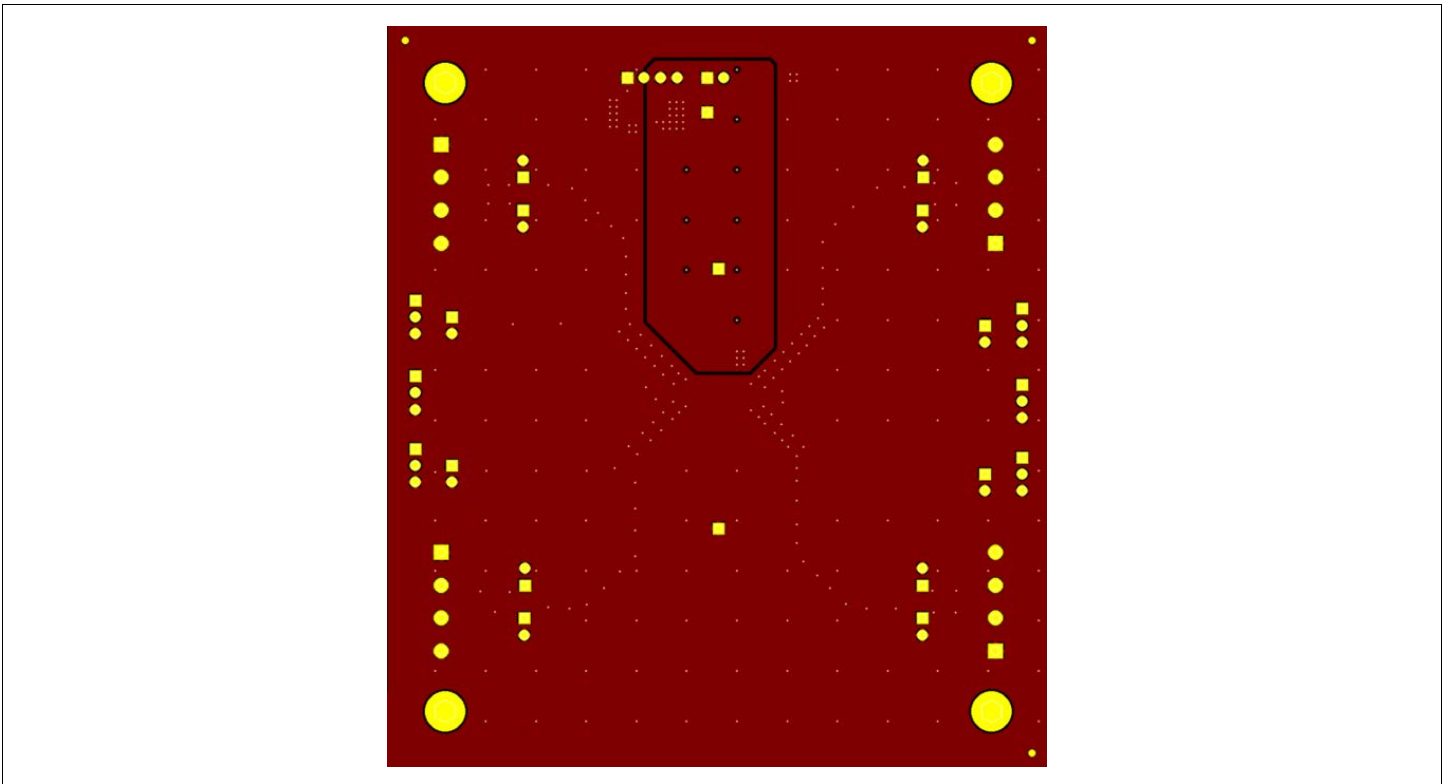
EVK PCB Layer 4—Bottom View (TSSOP16)
